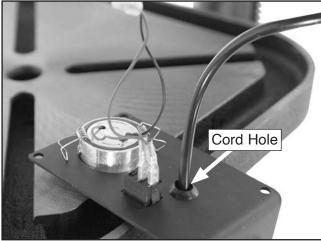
Laser module electrical box cord fed through LED assembly hole.
